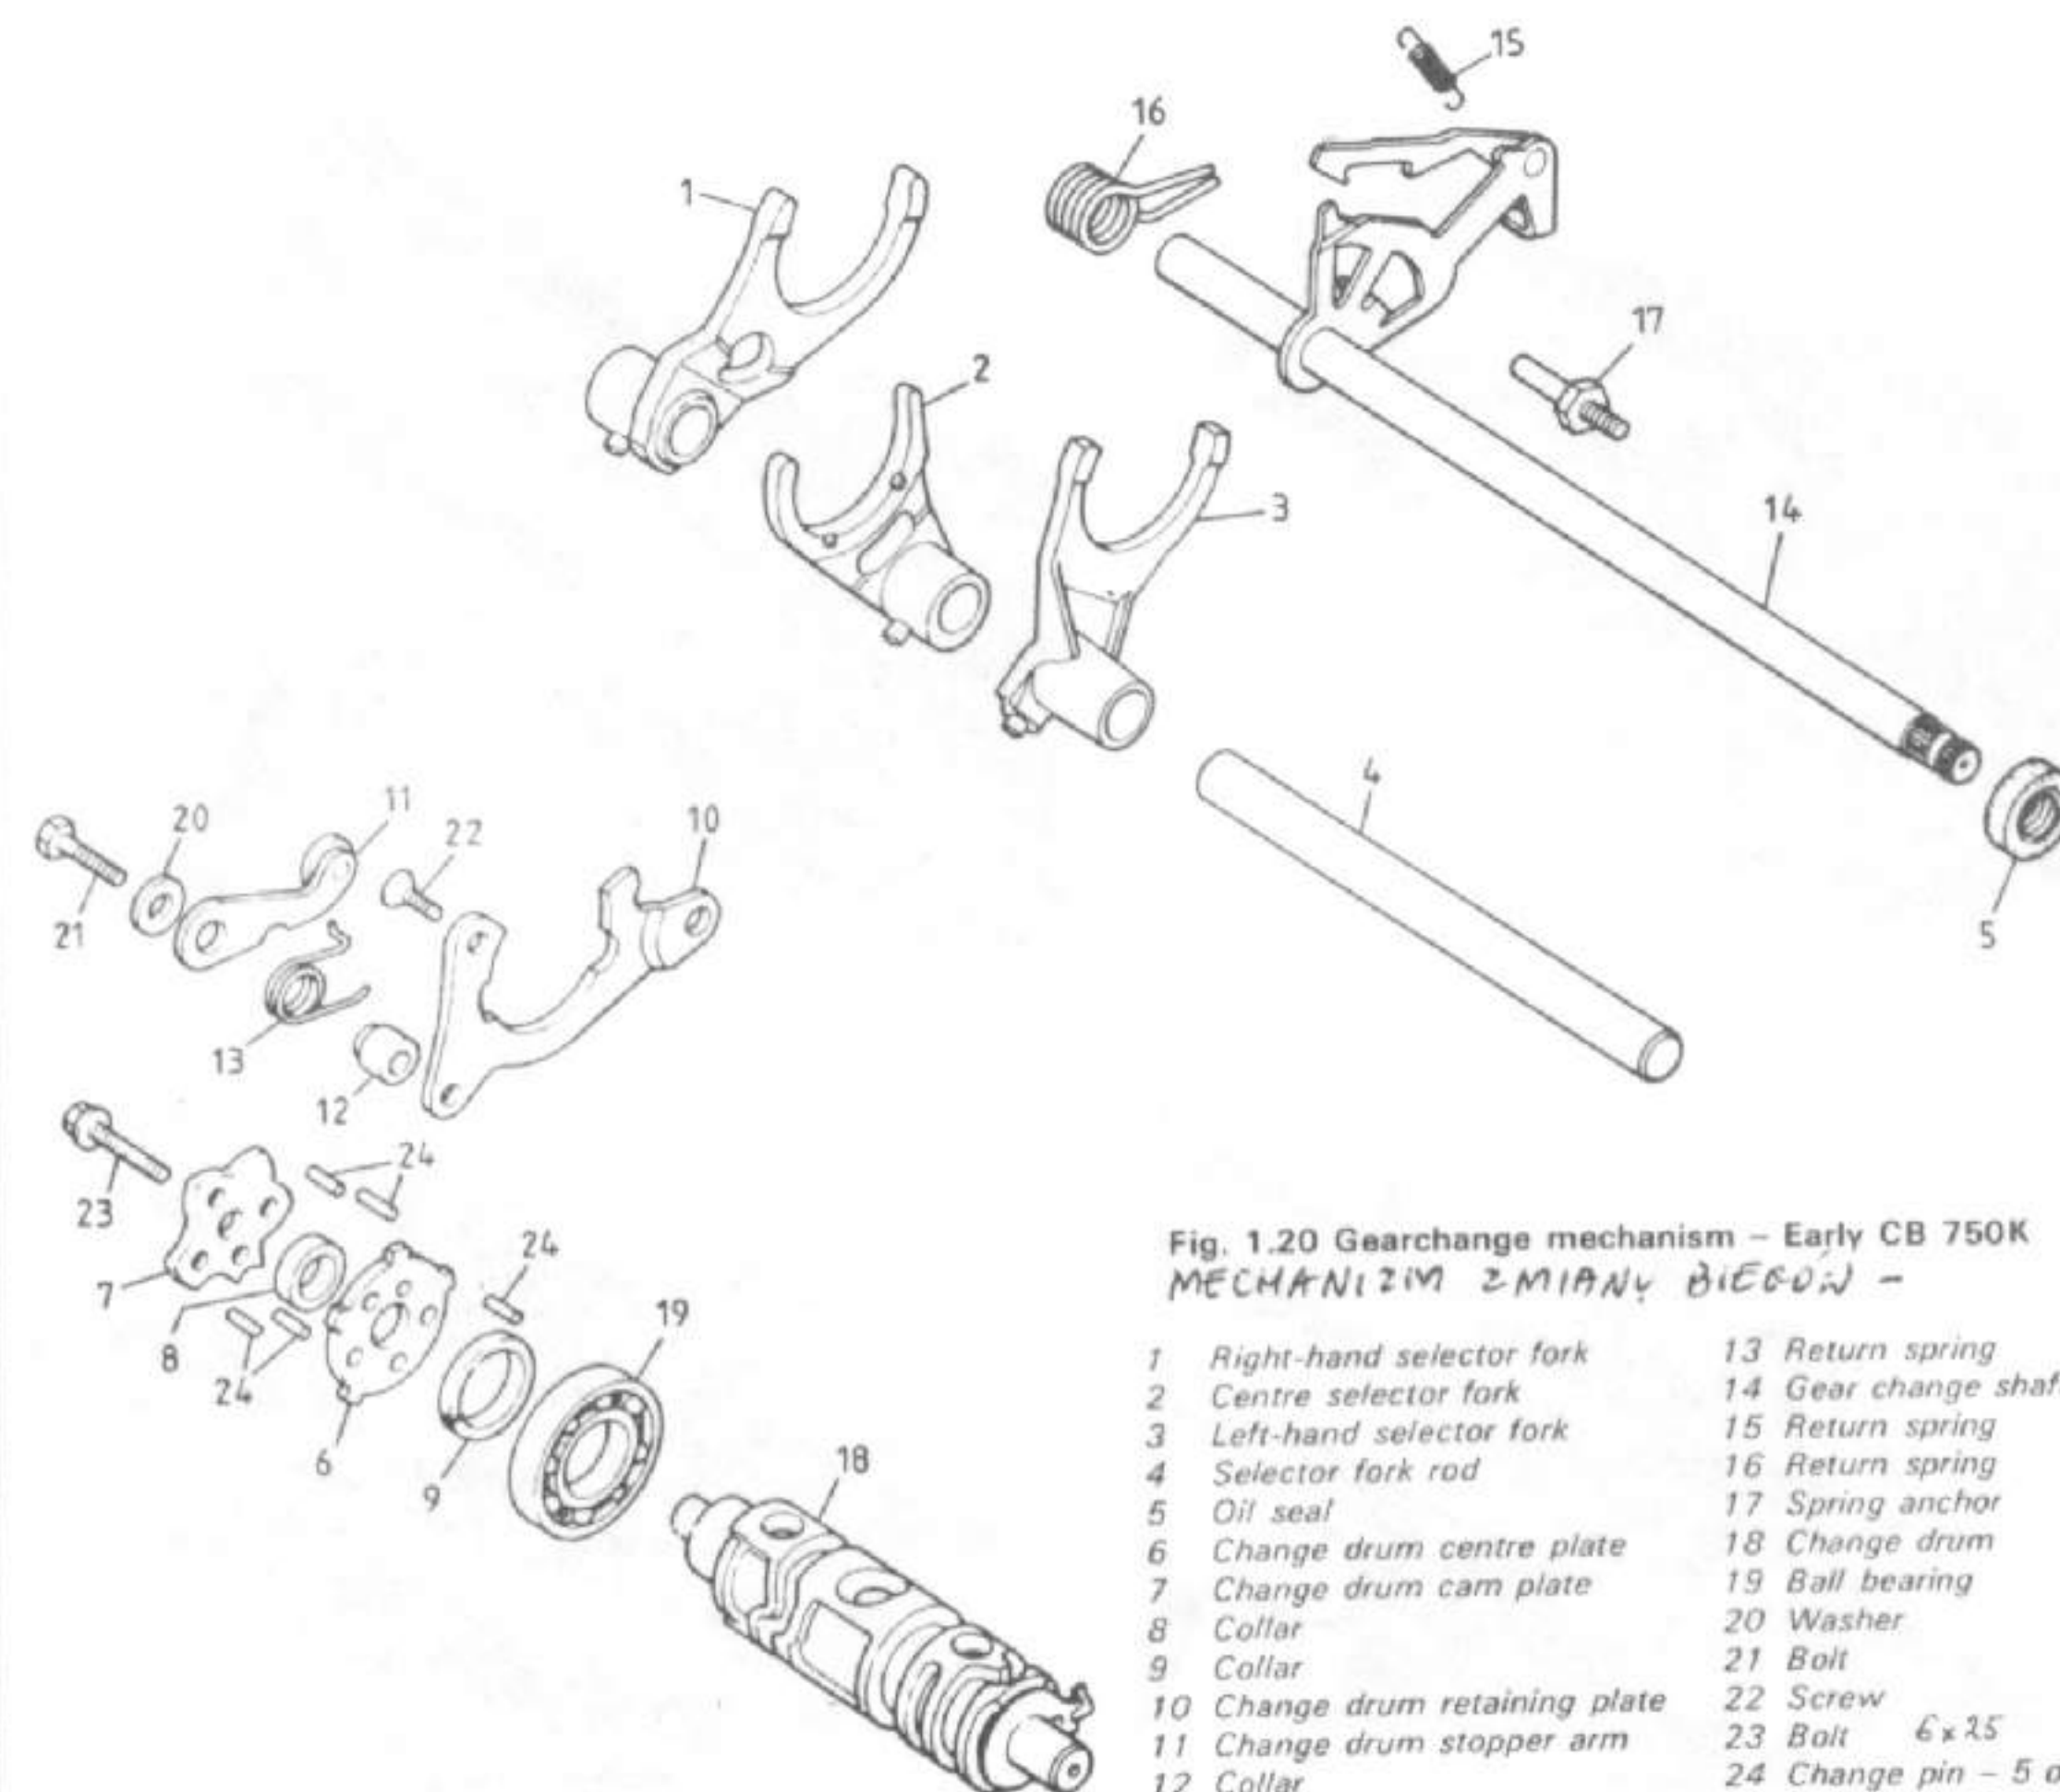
Gearchange mechanism - Early CB 750K
